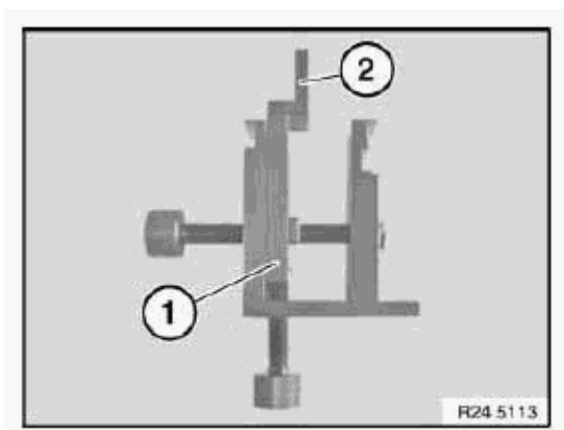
Special Tool (24 4 161) And Shaped Piece
